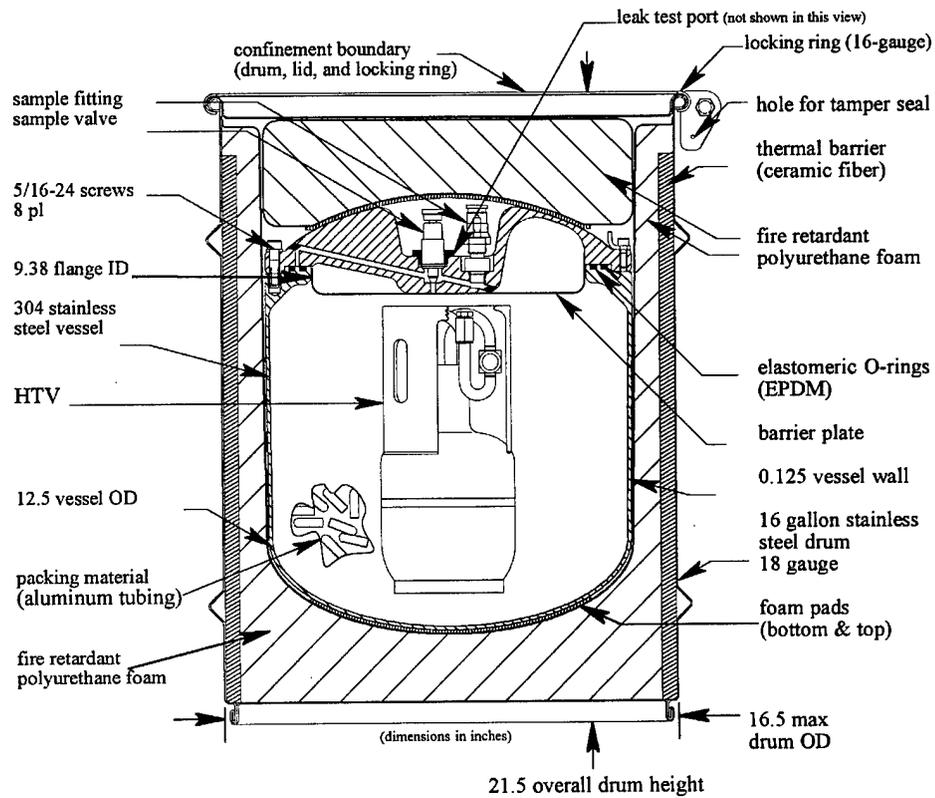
HTV Packaged Inside an H1616-1 Shipping Container.
